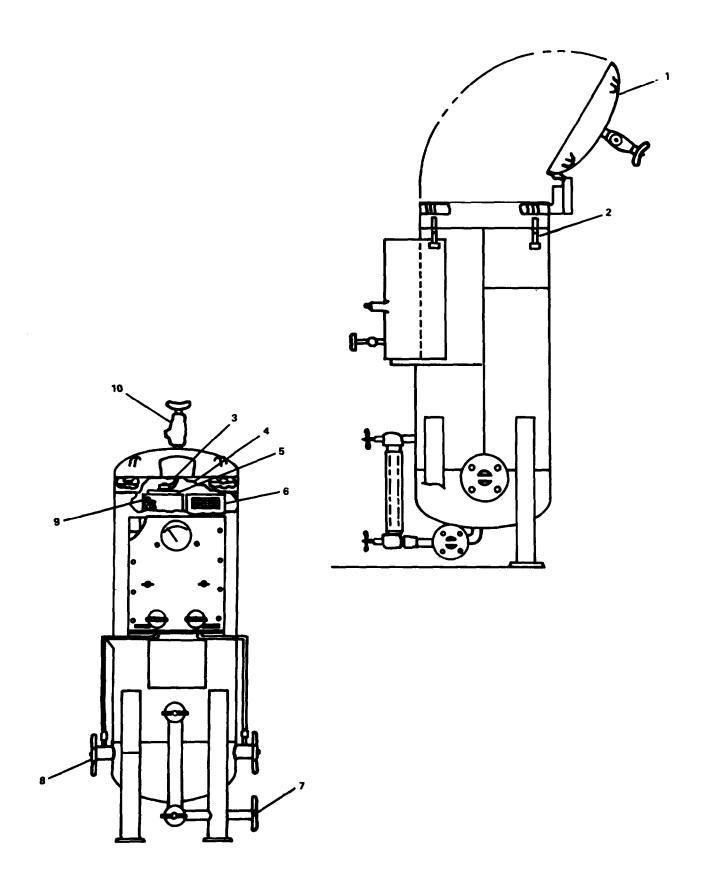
<u>Diesel Fuel Oil Filter/Separator</u>.
